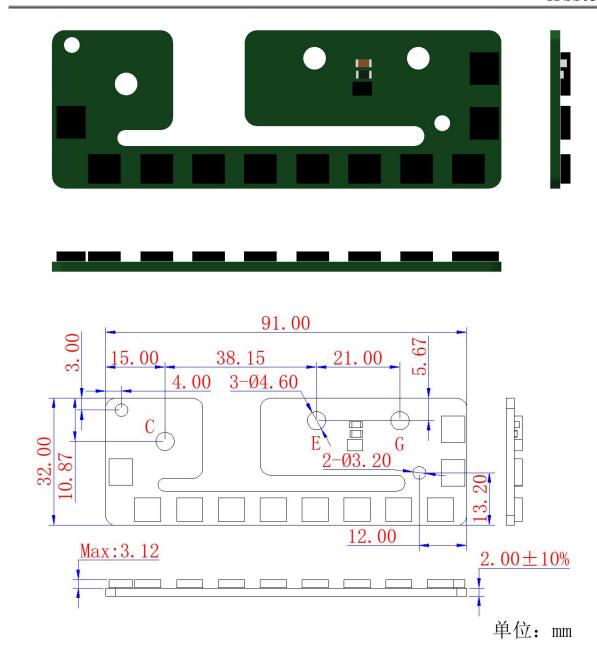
Mechanical dimensions of adaptor board(unit: mm)
